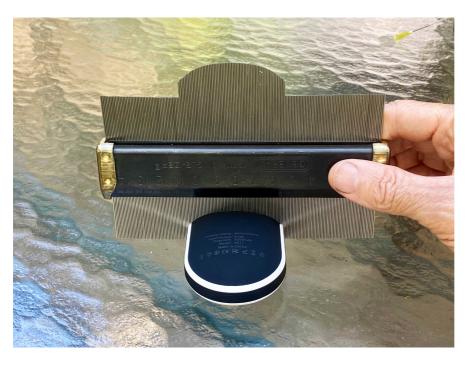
General Tools 837 profile gage is pressed onto a handwarmer to capture its cross-sectional shape and dimensions.
